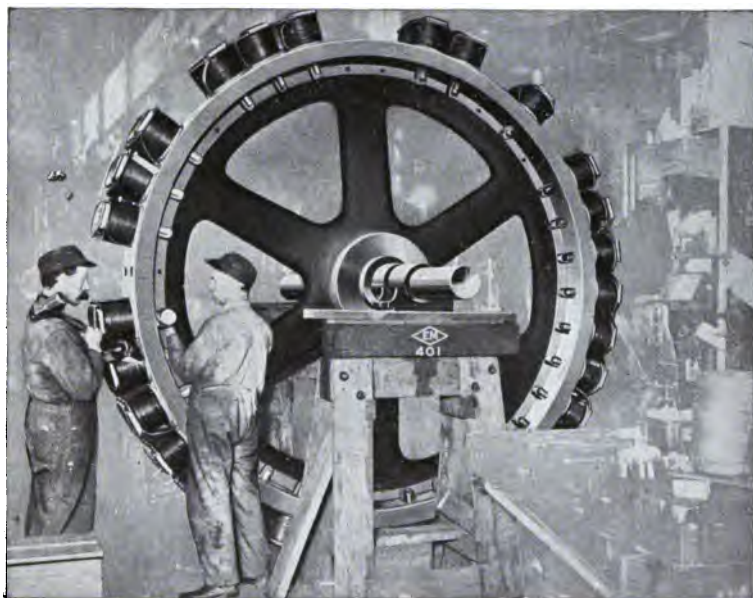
Rotor Construction (Electric Machinery Co.).
